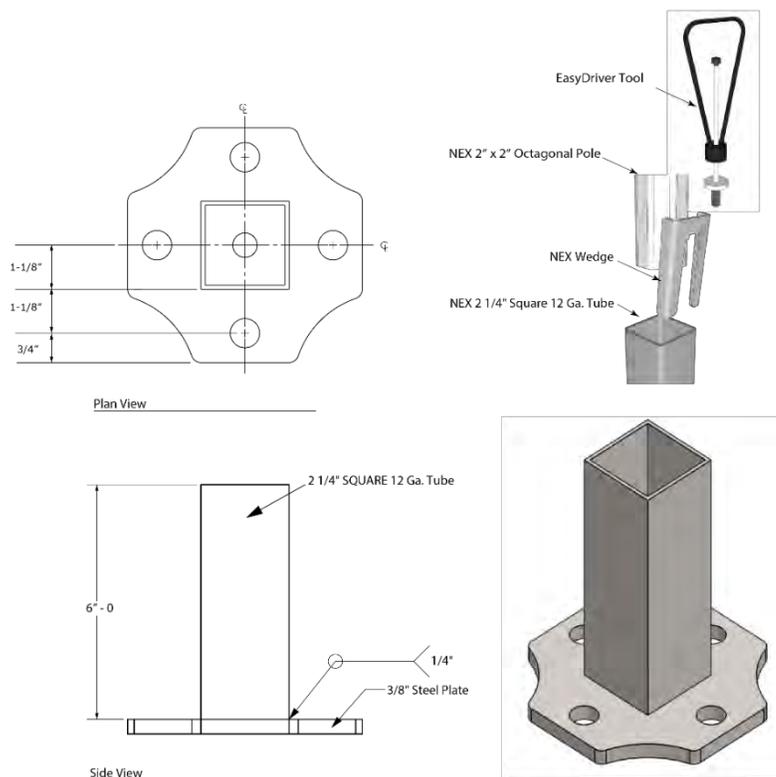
BASE FLANGE FLAG MOUNT (TYPICAL)
